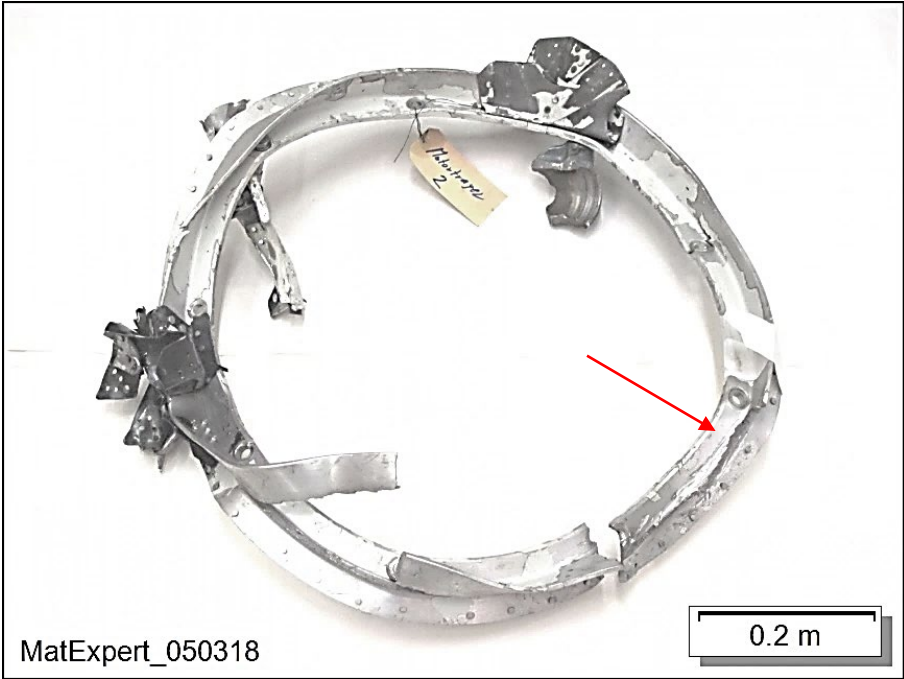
Severely deformed and broken centre engine mount. A part of the fracture surface on the engine mount (red arrow) was analysed.
